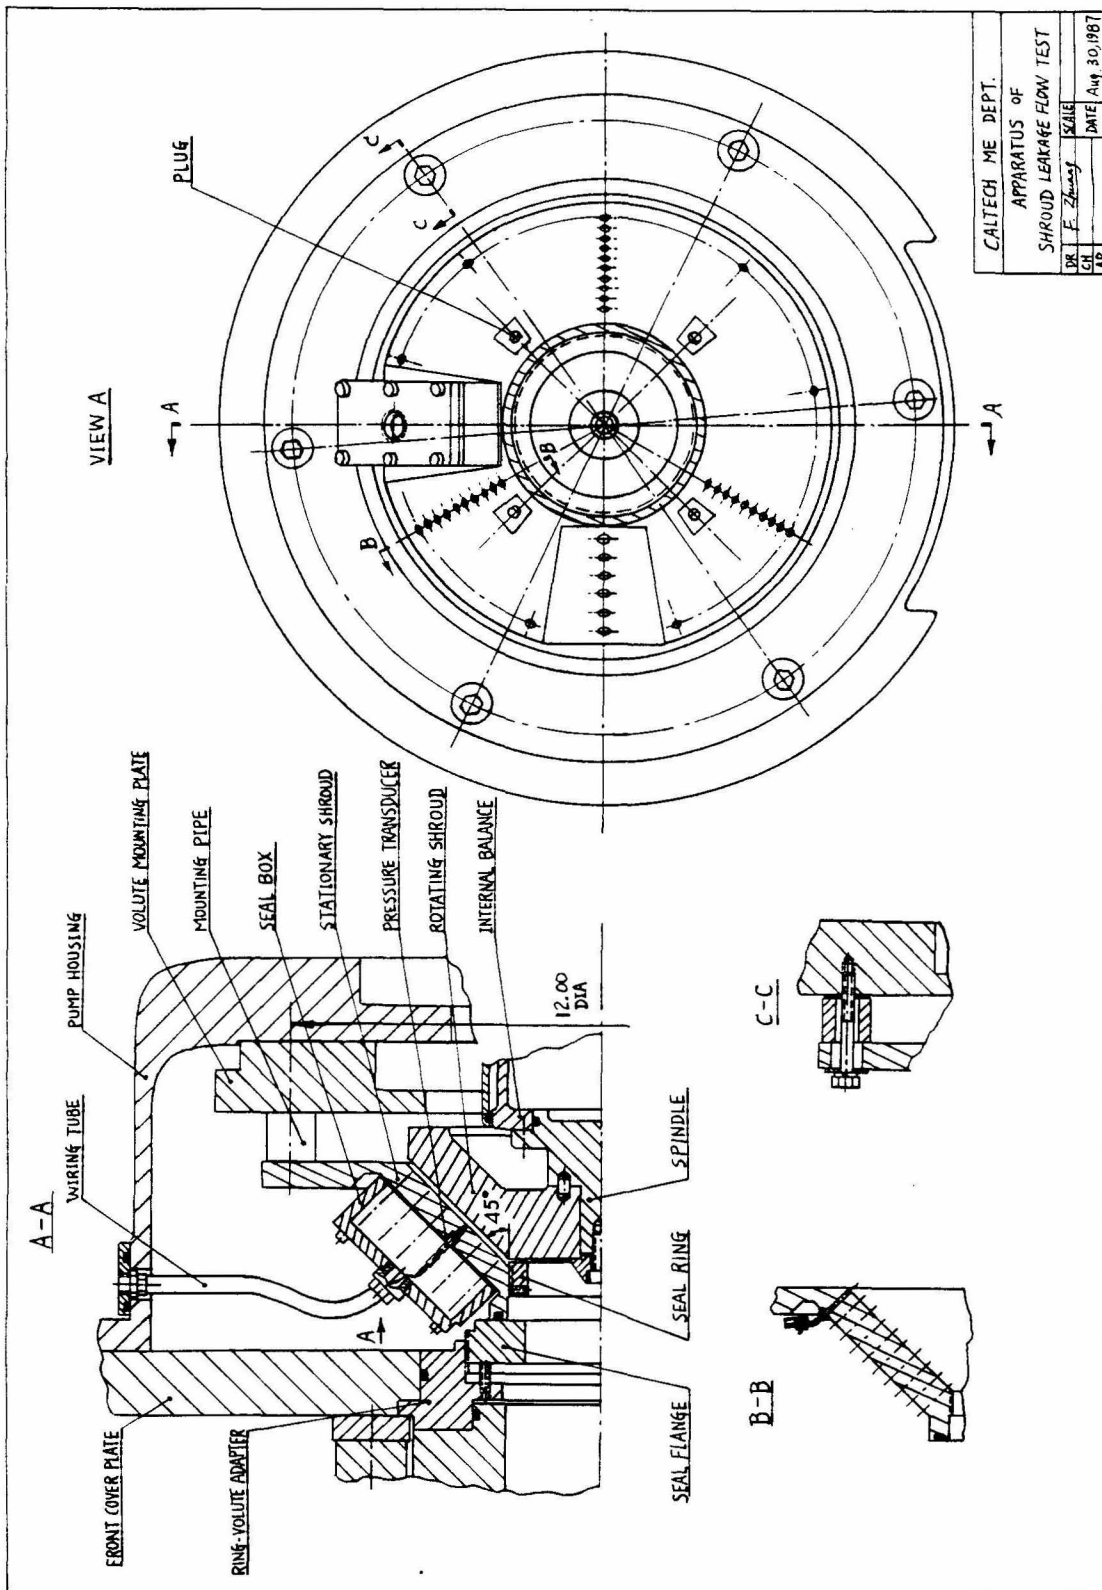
Assembly drawing of the shroud force test apparatus.
